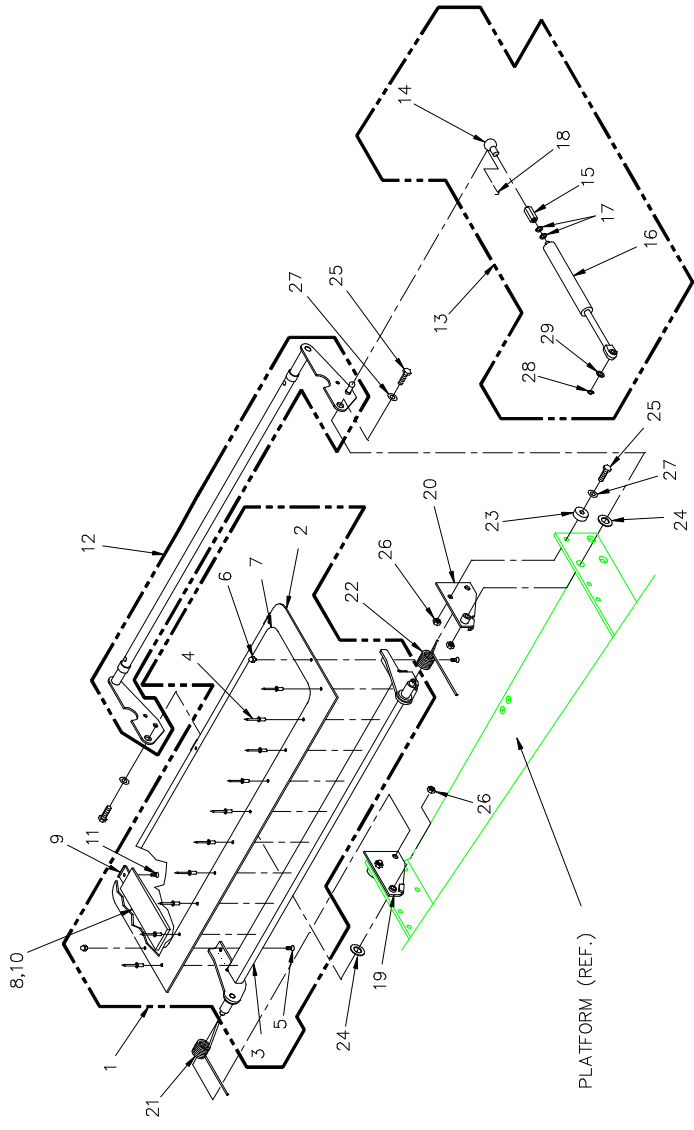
BRIDGEPLATE ASSEMBLY
